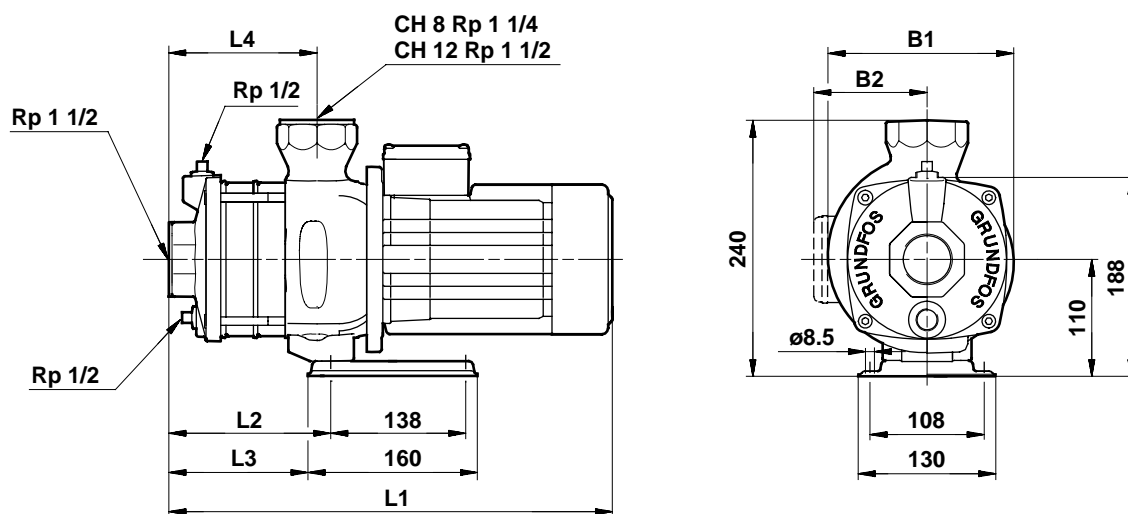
Dimensional sketches CH, CHN 8 and 12 with MG 80 motor
